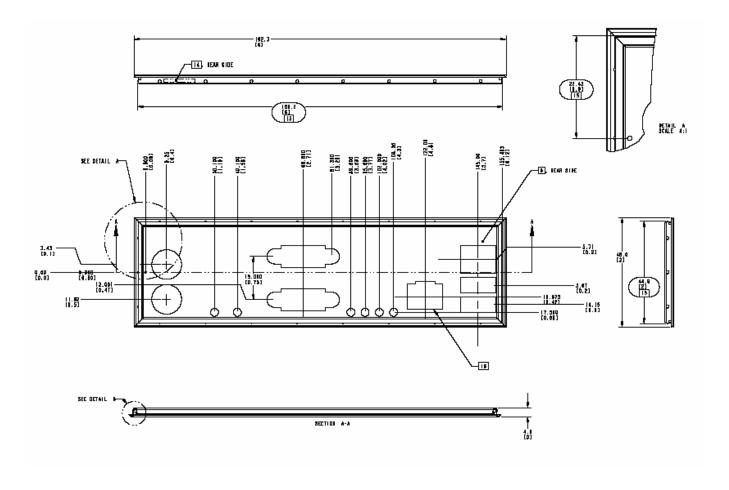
Pedestal Mount I/O Shield Mechanical Drawing for Intel $^{\tiny{(8)}}$ Server Boards S3000AH and S3000AHLX
